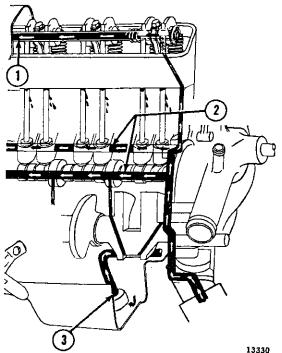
ENGINE LUBRICATION SYSTEM—
